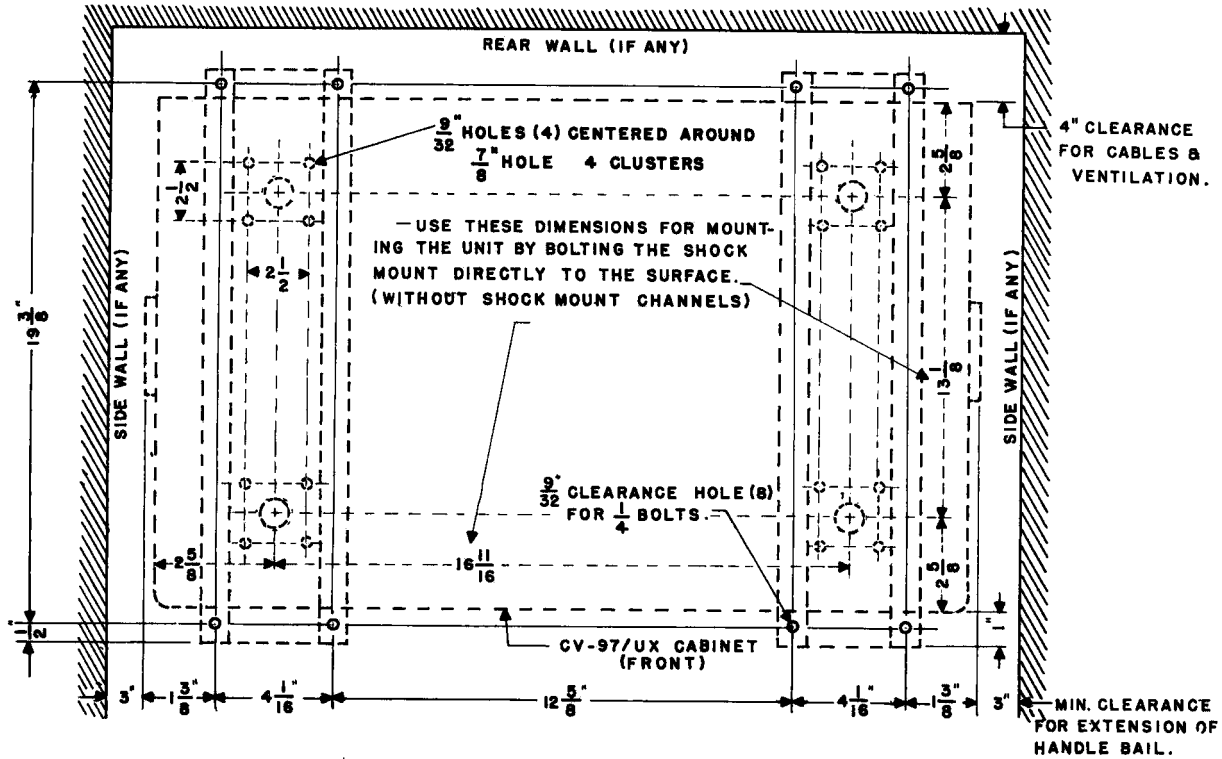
Drilling Plan for Mounting CV-97/UX.
